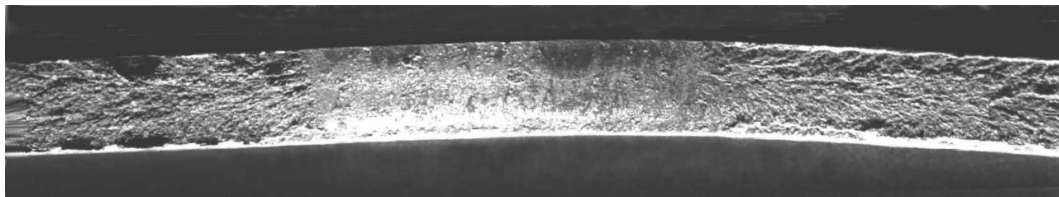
View of a TW, nearly rectangular cold weld: $t = 0.312$, shown surface OD up
